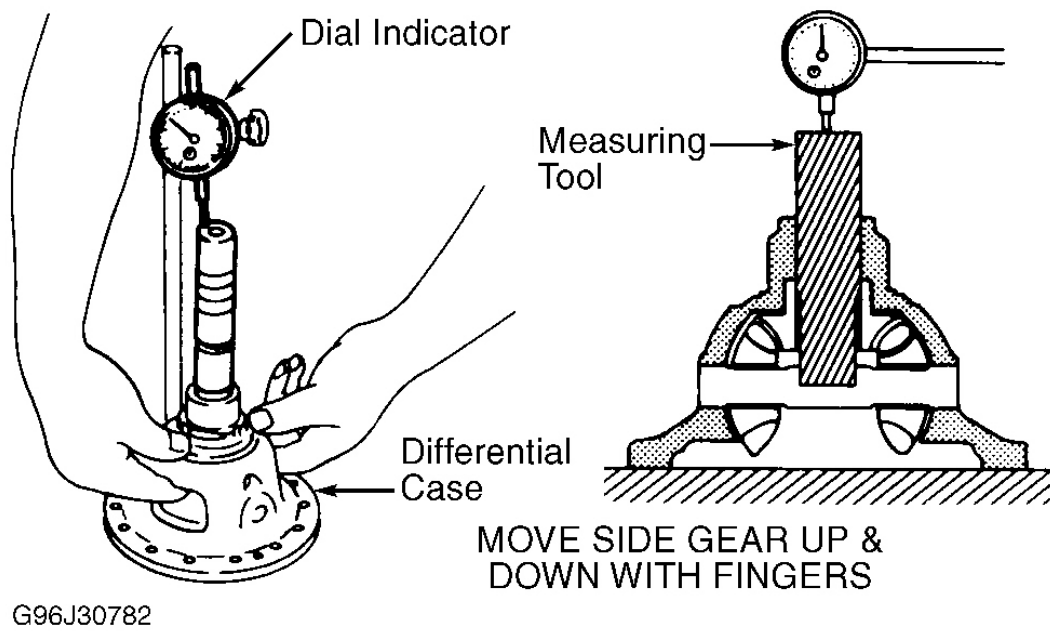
Measuring Side Gear-To-Differential Case Clearance
